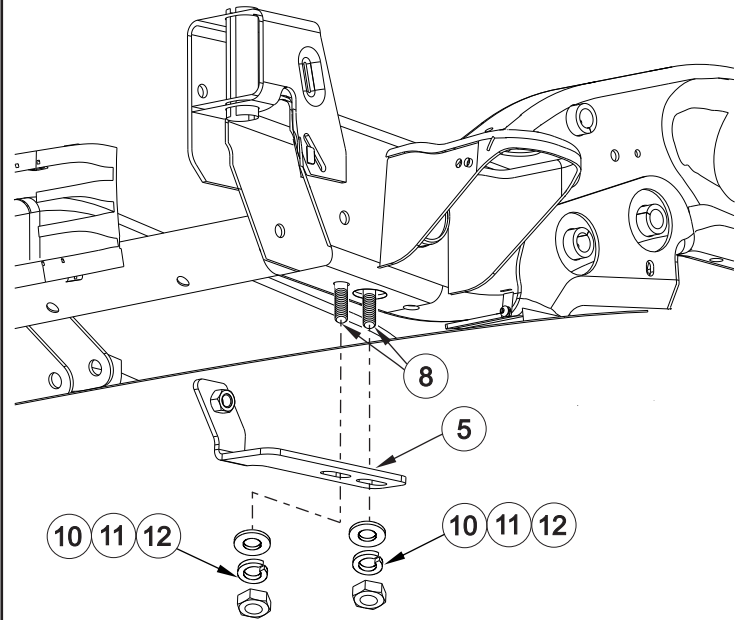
DRIVER SIDE INSTALLATION SHOWN
